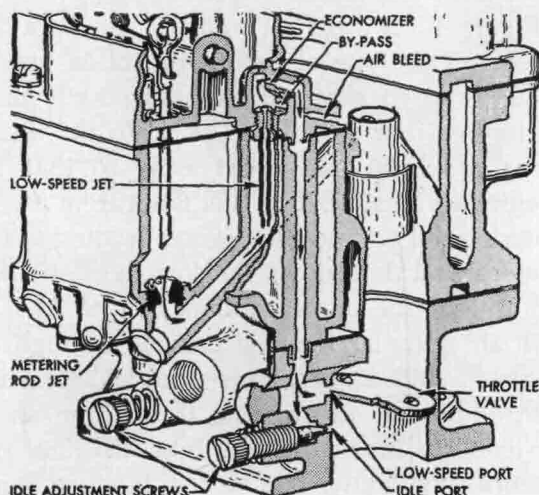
Carburetor partly cut away so that idle-and-low-speed circuit of one barrel can be seen. Fuel flow is shown by arrows. Carburetor shown is a dual, or two-barrel unit. (Buick Motor Division of General Motors Corporation)
